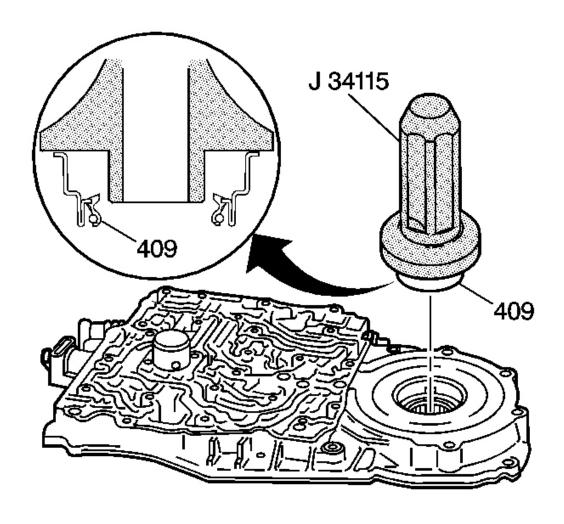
Installing Left Side Axle Oil Seal Assembly Courtesy of GENERAL MOTORS CORP.
